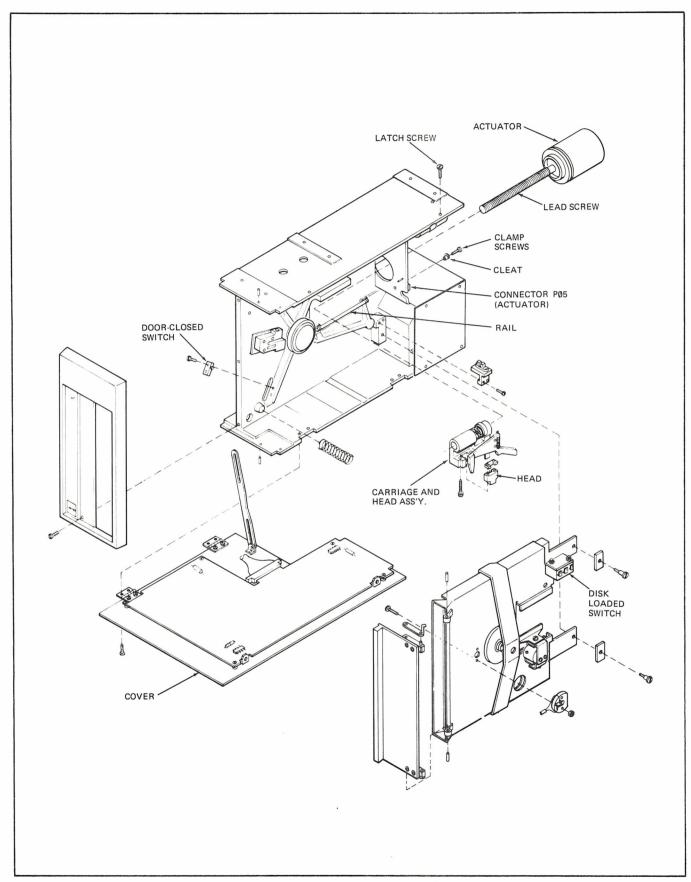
CARRIAGE AND POSITIONER ASSEMBLIES
